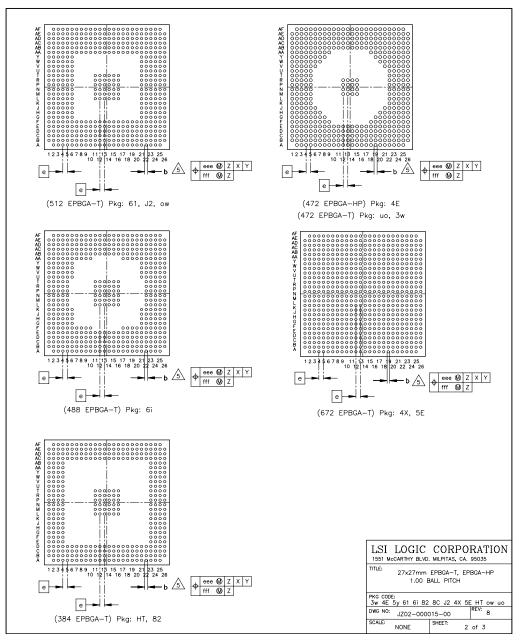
472-Pin EPBGA-T (UO) Mechanical Drawing (Sheet 2 of 3) (Cont.)
